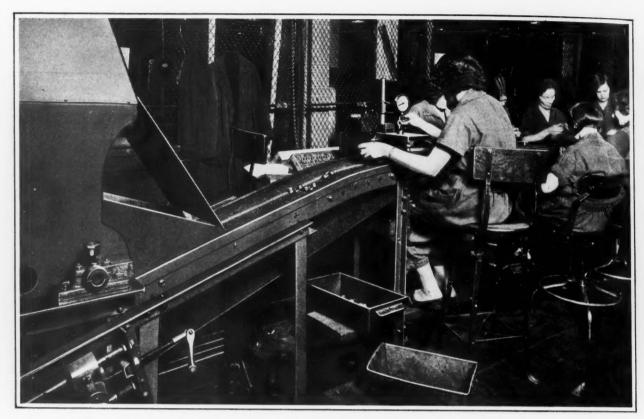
A Washing Machine Delivers the Shock Absorber Wings to a Conveyor which Carries them past a Group of Girls who Inspect All Important Dimensions
